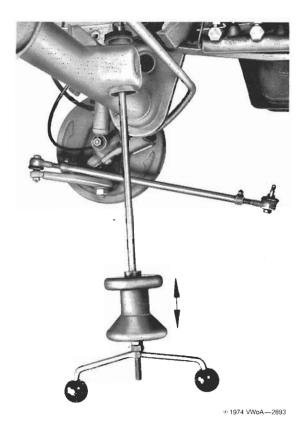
Bushing being driven out. Move the hammer as indicated by the double arrow.
